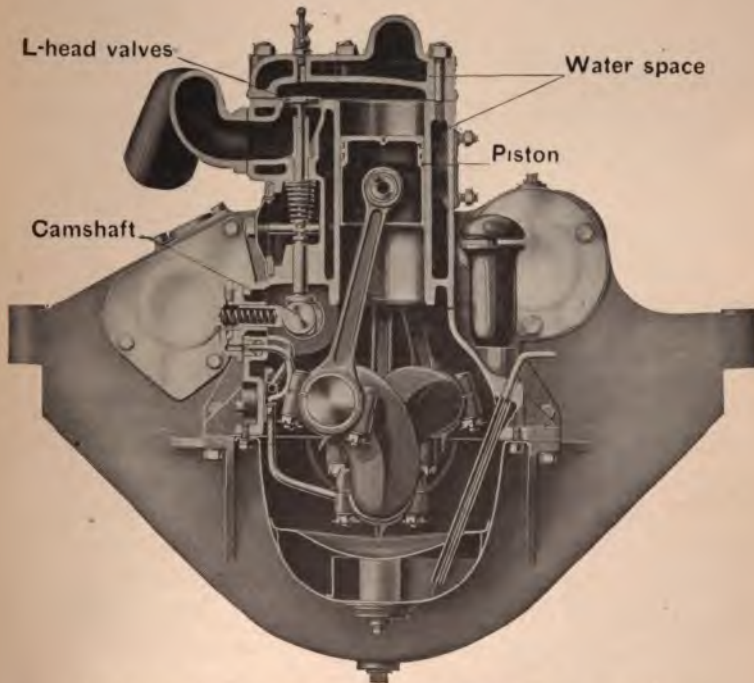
Front view showing construction of a 6-cylinder automobile engine
